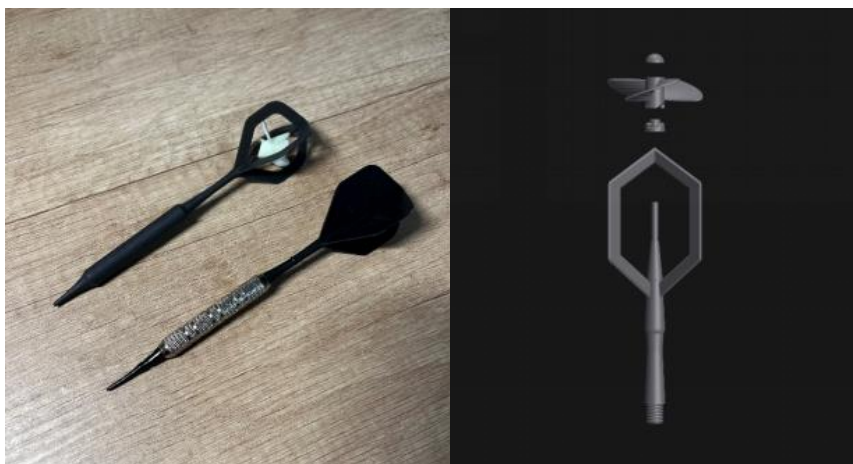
Manufacturing darts for wheelchair players using 3D printing technology.
